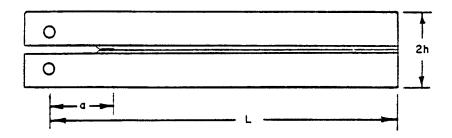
Double Cantilever Beam (DCB) Specimen with Side Grooves.
